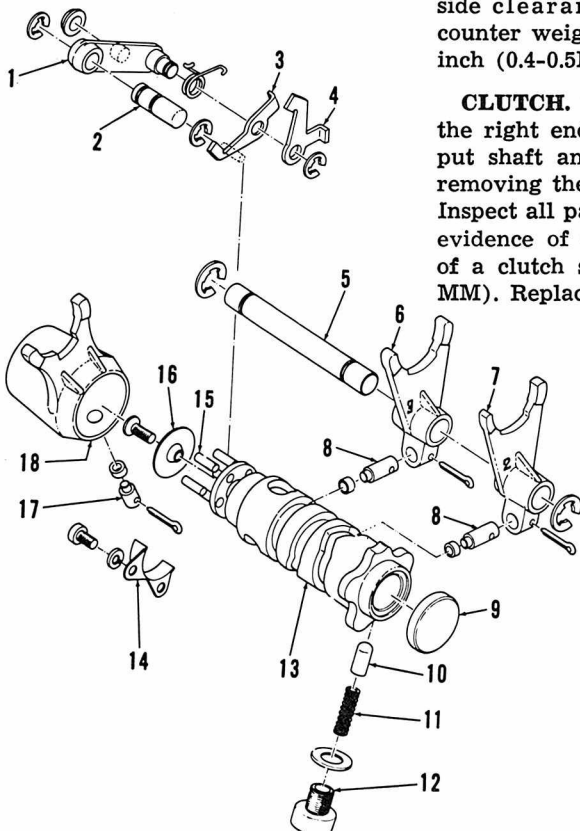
Exploded view of shift components used in DT-1 and RT-1 models.
